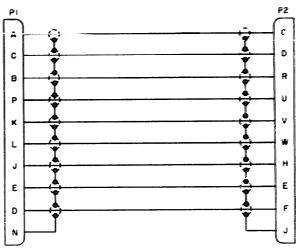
Cable Assembly, Special Purpose, Electrical CX-12725/U, wiring diagram.
